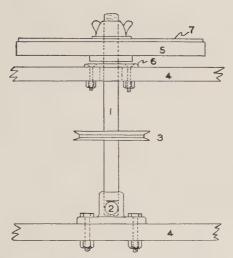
Master Lap With Interchangeable Discs For Cutting or Polishing. 1, spindle; 2, ball-bearing; 3, traction pulley; 4, section of lapidary bench; 5, master lap; 6, bearing; 7, interchangeable disc.
